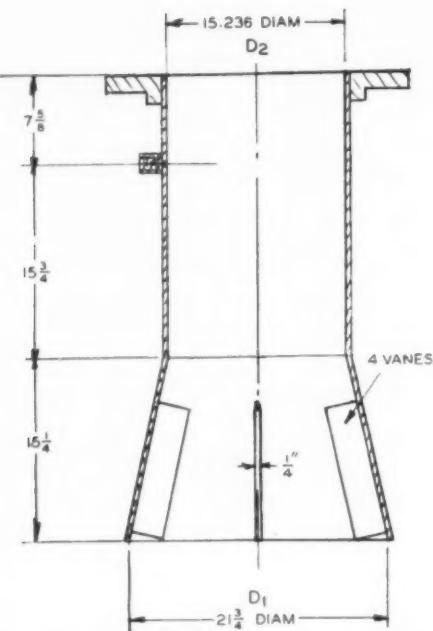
DIMENSIONS OF 15-IN. WELDED INTAKE METER
